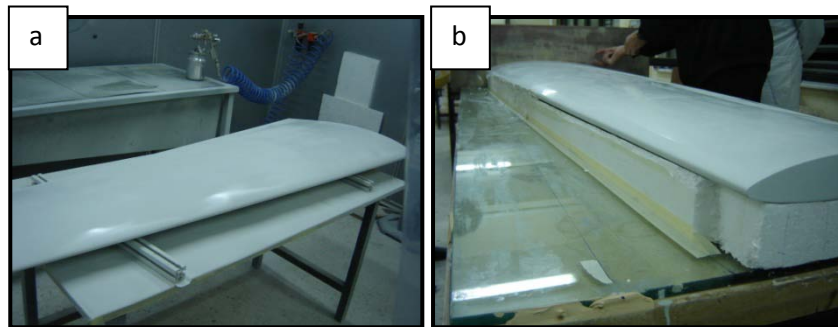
Male mold (a), male mold positioned for female mold production (b)
